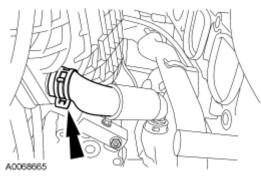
Locating Positive Crankcase Ventilation (PCV) Hose Courtesy of FORD MOTOR CO.
